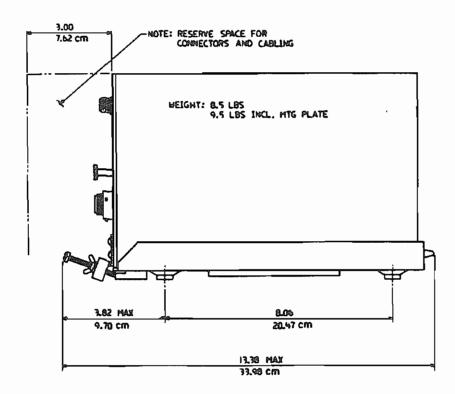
Outline Dimensions, ACU-150D and Mounting Plate Assembly.
